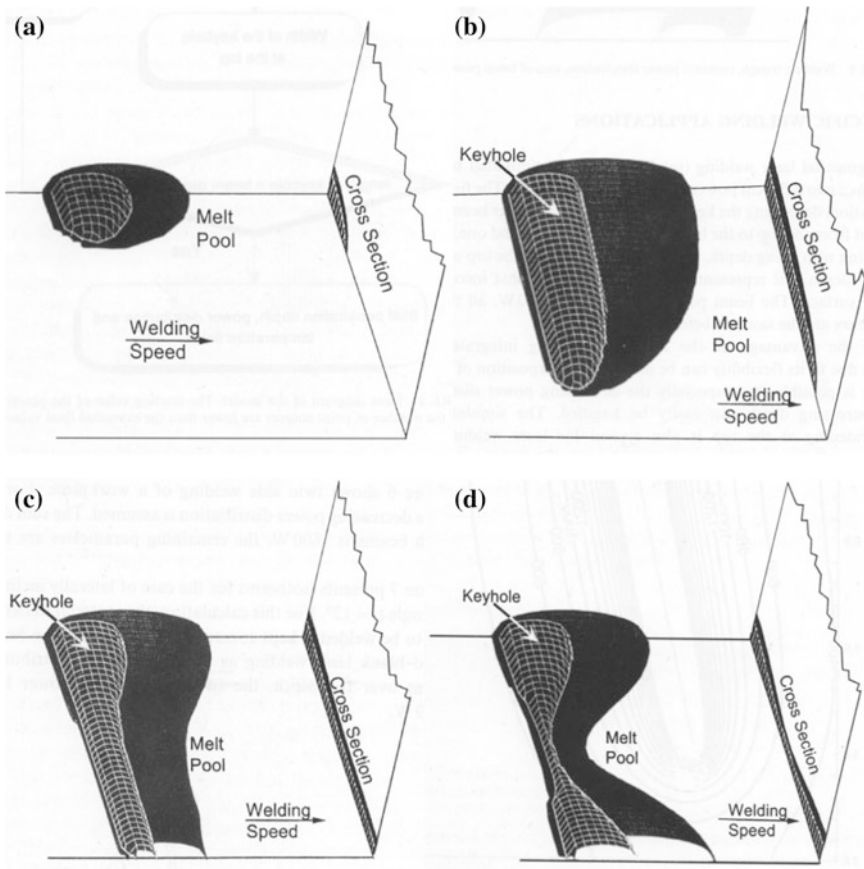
Calculated shape of the melt pool and keyhole based on superposition of moving point sources of heat: a low power (500 W), not welded through, b moderate power (1500 W), not welded through, c high power, welded through, widening at the top, d widening at top and bottom (e.g. twin-sided welding). Reprinted from [8], copyright (1998) with permission from Old City Publishing
